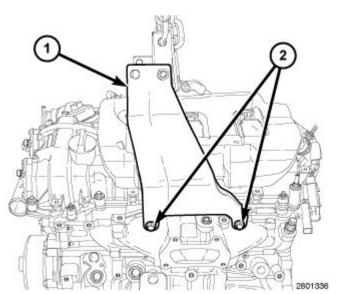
Upper Intake Manifold & Bolts Courtesy of CHRYSLER GROUP, LLC
